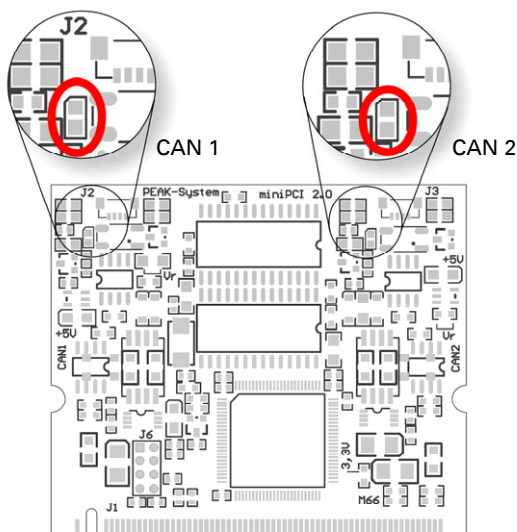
Positions of the solder fields on the PCAN-miniPCI card
